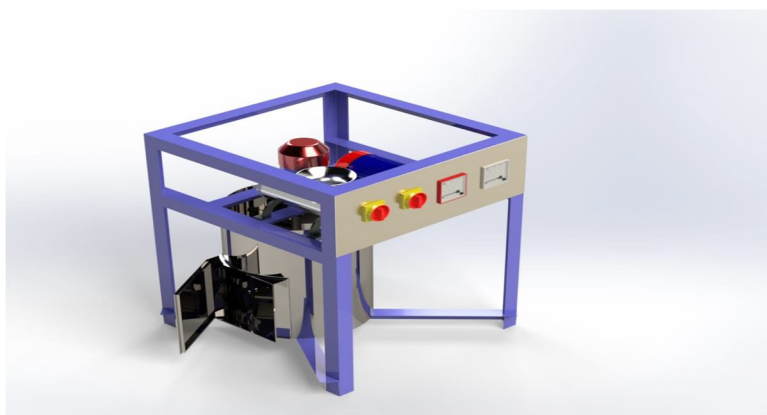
3D view of compost machine designed in SOLIDWORKS
